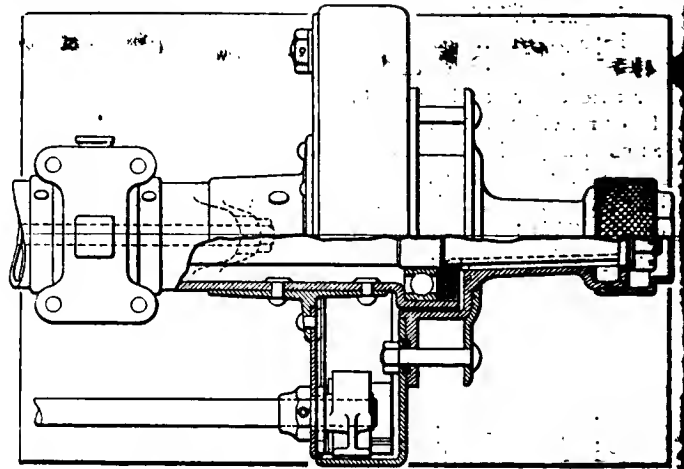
Hub end of a live rear axle, showing drawn steel brake drum attached to hub flange
